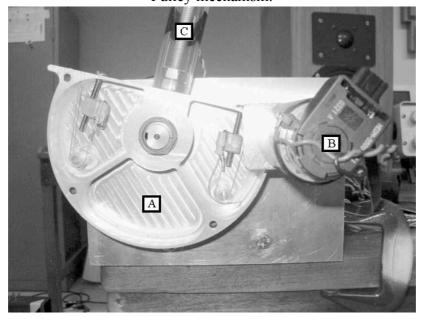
Assembled gear system. (A) Pulley Mechanism, (B) Motor, (C) Arm in upright position. The wire tightening mechanism can be seen inside the body of part A.
